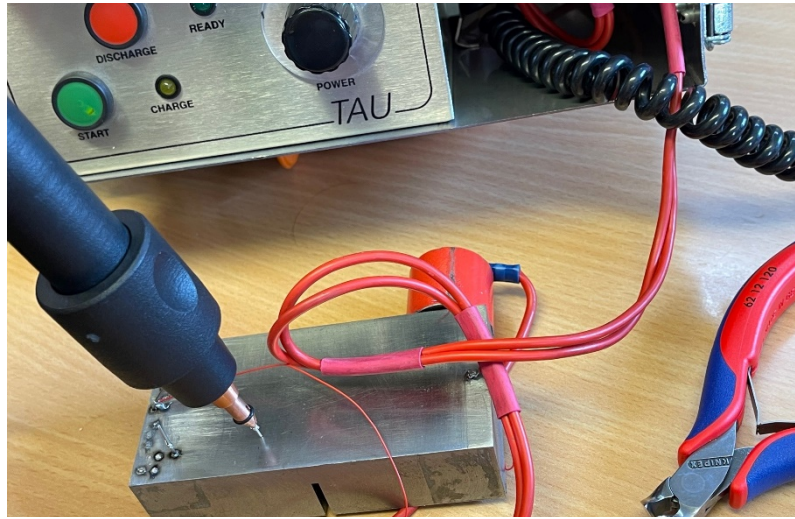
The Tau thermocouple welder connected to the Matelect pin welding head, with several welds already having been made, and a pin located in the weld head ready for operation of the Discharge button. Note the second electrode is in the form of a magnet. For non-magnetic specimens, the specimen can either be placed on a steel plate (assuming both are in good electrical contact) or a mechanical clamp could be used.
